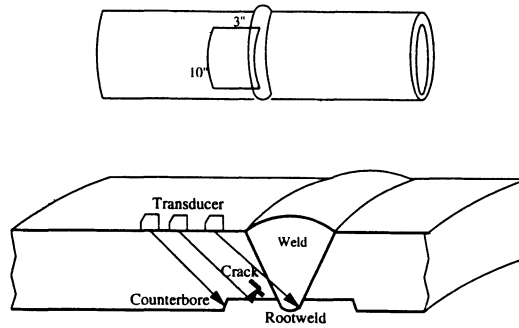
Ultrasonic weld inspection for nuclear power plant pipes: areas around welding are scanned.
